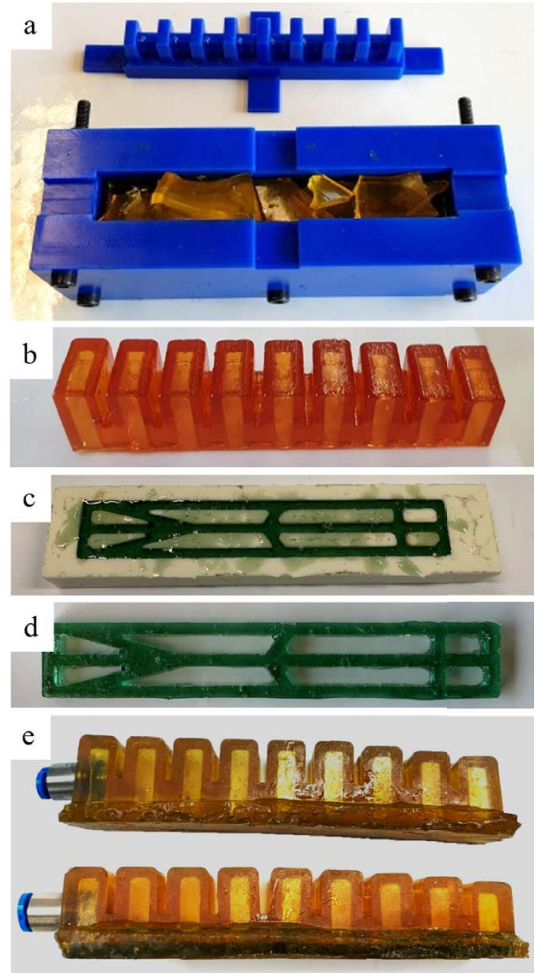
Fabricated method for the bending pneumatic actuators. a) DPBM-FT5000-r0.5 or r0.58 pellets are placed in a nylon outer mold and heated to 120°C, above their gel transition temperature ( $T_{gel}$ ). Consequently, the pellets degel into a viscous liquid, taking the shape of the mold. By compression molding the inner mold into the outer mold, the internal structure of the actuator is formed. b) Result of the compression molding step. c) The less flexible DPBM-FT3000-r1 material is cast in an epoxy mould by heating the material to 150°C, on which it degels into a liquid above its  $T_{gel}$ . d) Result of the casting step. e) The bottom and top part of the actuators are joined by chemically binding the parts together using strong covalent Diels-Alder bonds that result from a heat-cool cycle with an isothermal at 80°C for 1 hour.
